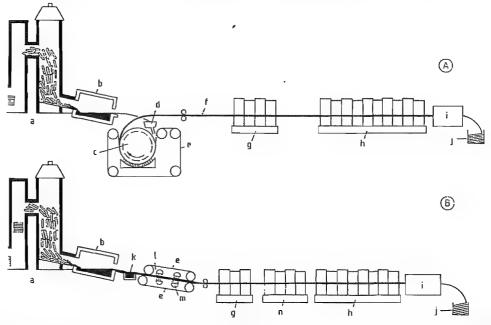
Scheme of continuous rod casting and rolling [186]. A) Southwire process; B) Contirod process. a) Melting furnace (ASARCO); b) Holding furnace; c) Wheel; d) Tundish; e) Steel band; f) Continuously cast copper bar; g) Preliminary rolling mill train; h) Finishing rolling mill train; i) Pickler; j) Coiler; k) Casting receptacle; l) Casting canal; m) Stationary edge dams; n) Middle rolling mill train.
